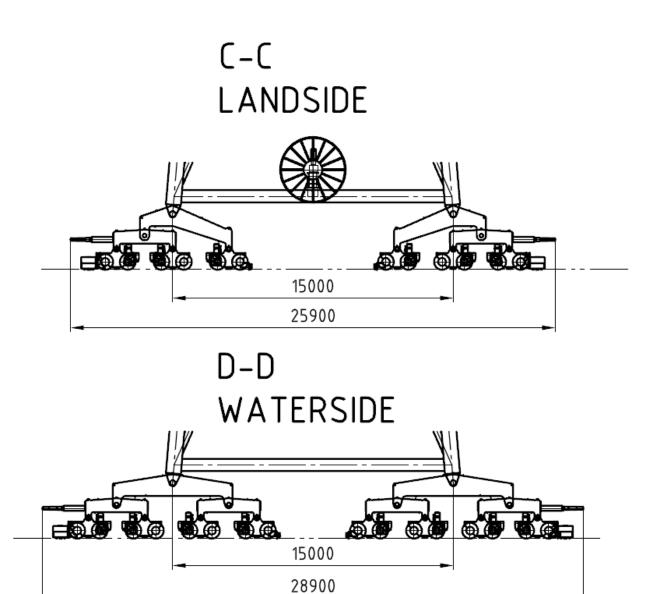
Elevation of Wheel Layout of Single Shiploader – assume minimum distance between 2 shiploaders is 2500 (Dimensions in mm) – to be confirmed
